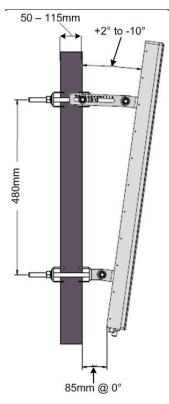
Adjustable Mounting Kit 2, with 'V' Blocks
